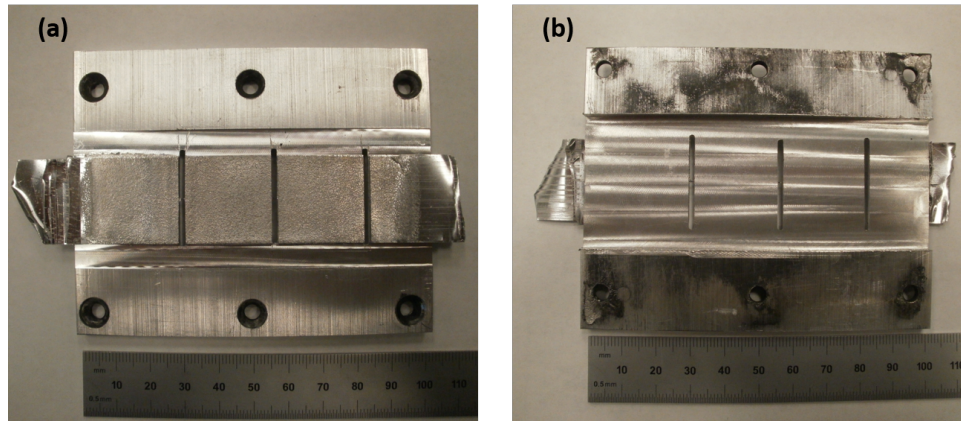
3-axis milling: (a) weld side with perpendicular notch penetrating through the entire sample; (b) backside of sample with removed baseplate material and cut notches.
